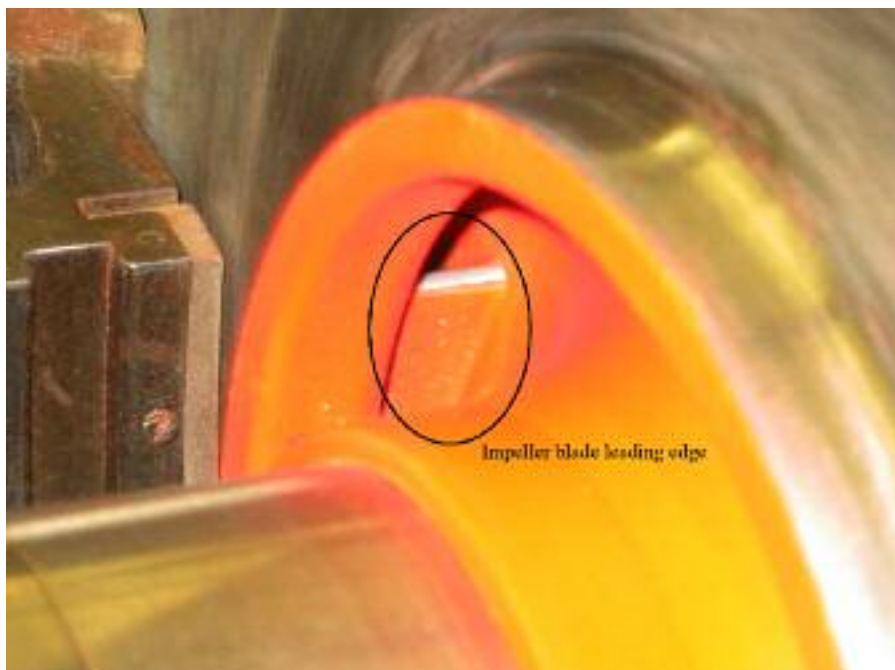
Leading edge visual inspection of the impeller blades after fine sand ingestion.
